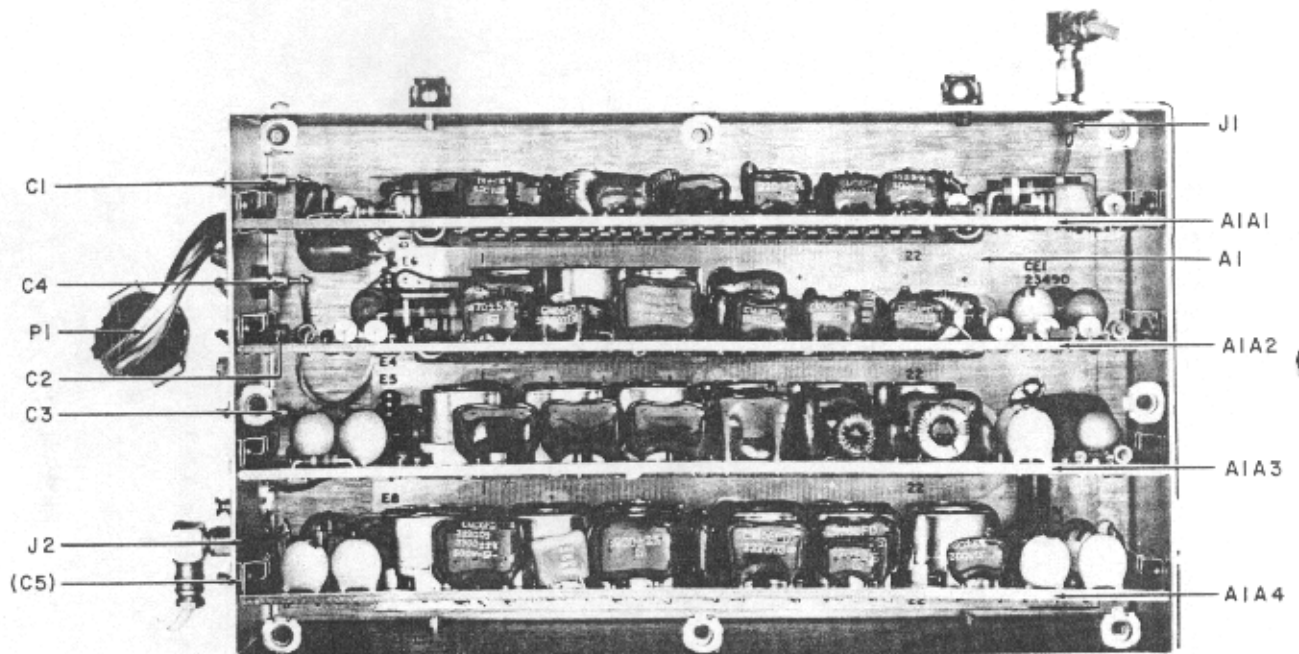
Type 791199 Input Filter Assembly (A1), Location of Components
